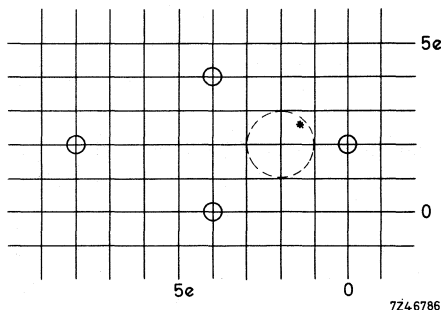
Hole pattern for mounting on a printed-wiring board. Grid hole diameter =  $1,3 \pm 0,1$  mm;
